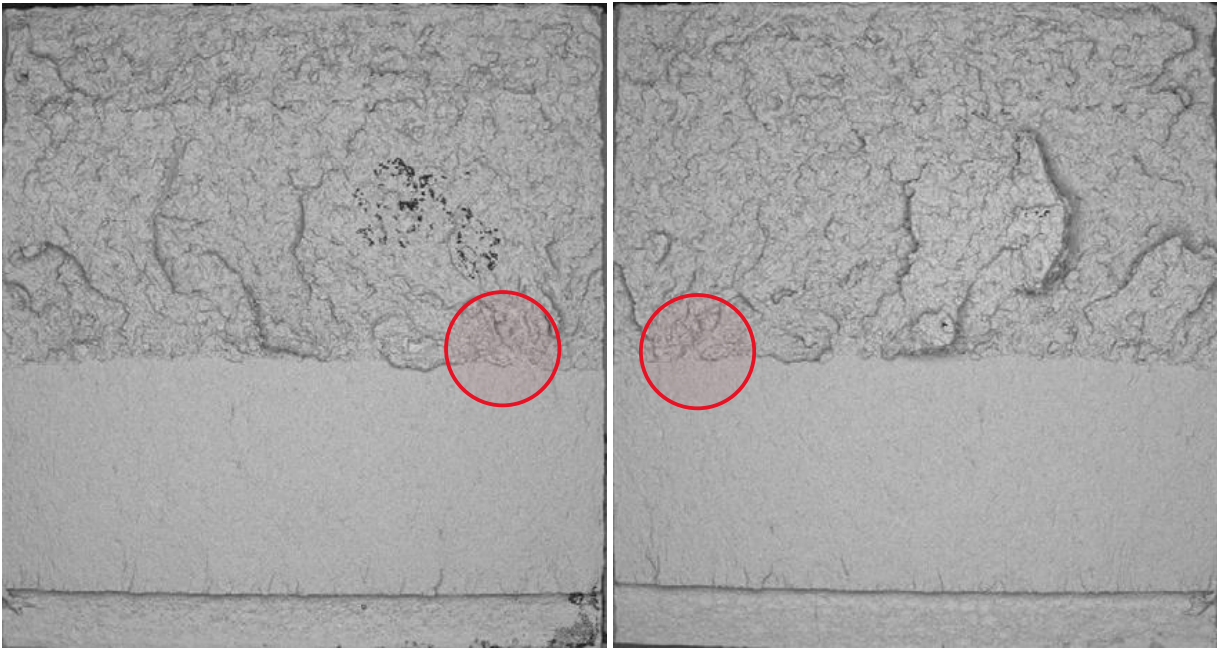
Left and right fracture surface of unirradiated SE(B) specimen B1C.R2.6, showing predominantly cleavage fracture. The approximate primary cleavage fracture initiation region is marked by a red circle. The test temperature was -90°C and the fracture toughness $73.6 \text{ MPa}\sqrt{\text{m}}$. Cleavage initiation occurs in a region without special features. There are isolated Al_2O_3 inclusions located in the fatigue fracture region, but they are not connected to the cleavage initiation event. Manganese sulfides at the fatigue crack tip can possibly have interacted with the cleavage fracture if they are close to the initiation site. Their location information is, however, not given.
